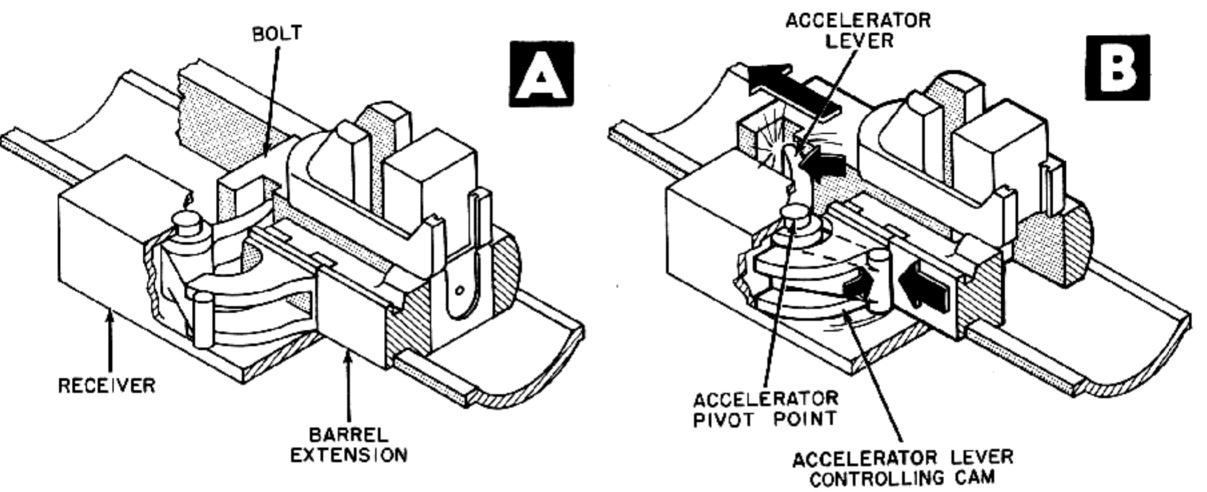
Pivoted Lever and Cam Accelerate Bolt to Rear.
